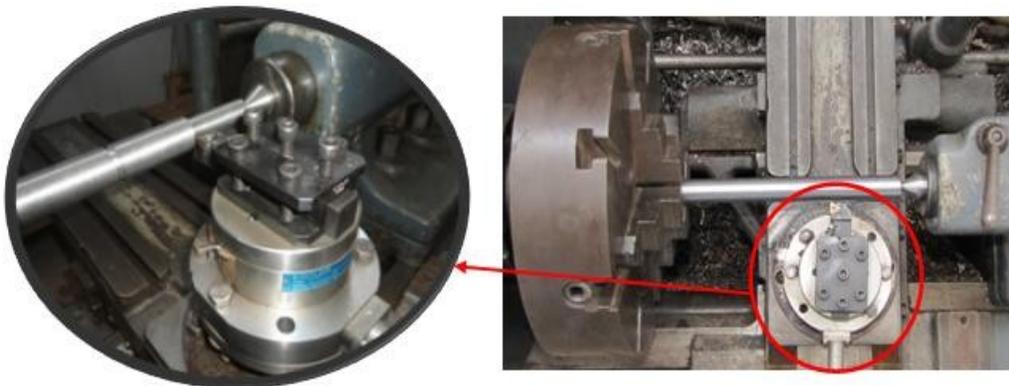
Tool overhang and workpiece clamped between chuck and tailstock
